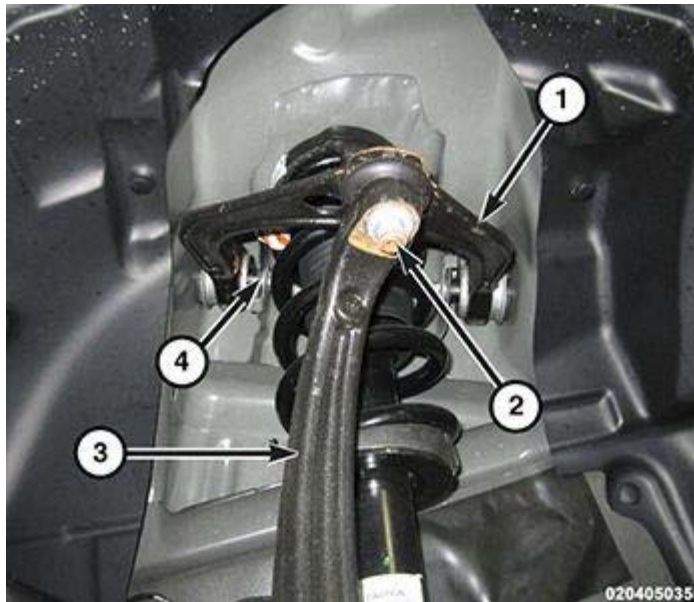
Upper Control Arm, Upper Ball Joint To Knuckle Nut, Knuckle & Upper Control Arm To Body Flag Bolt
